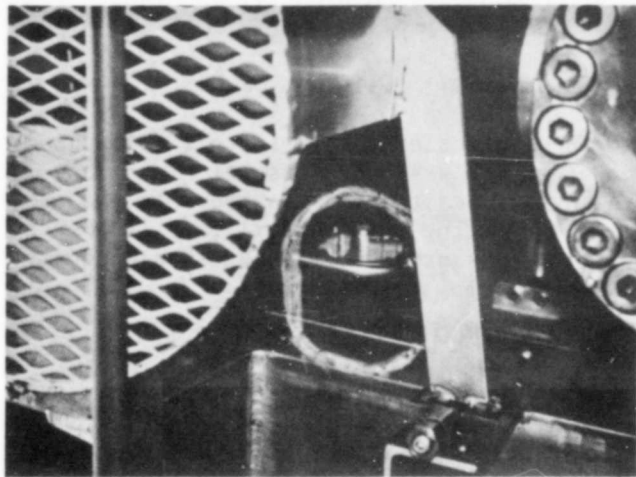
A. TRANSFER COMPRESSOR OIL FILTER
